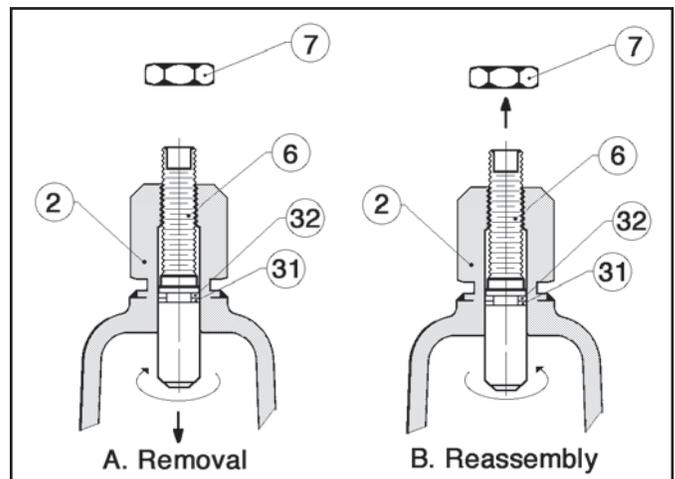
Adjusting screw (6) o-ring inspection.
